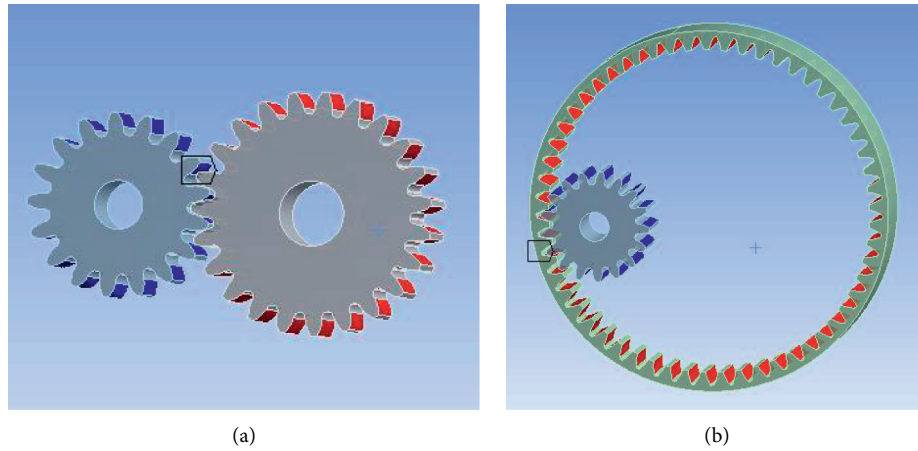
Friction contact pairs in a planetary gear train. (a) The contact pair between the sun gear and the planetary gear. (b) Contact pair of planetary gear and inner ring gear.
